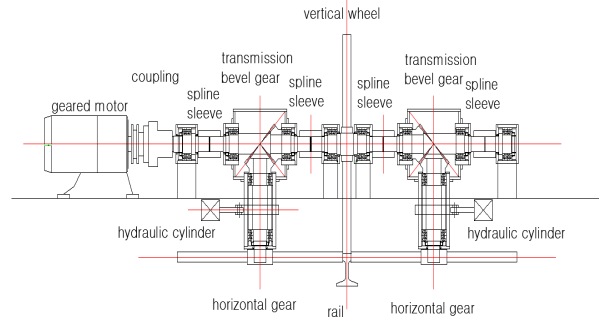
Single horizontal geared motor driven horizontal traction wheel system
